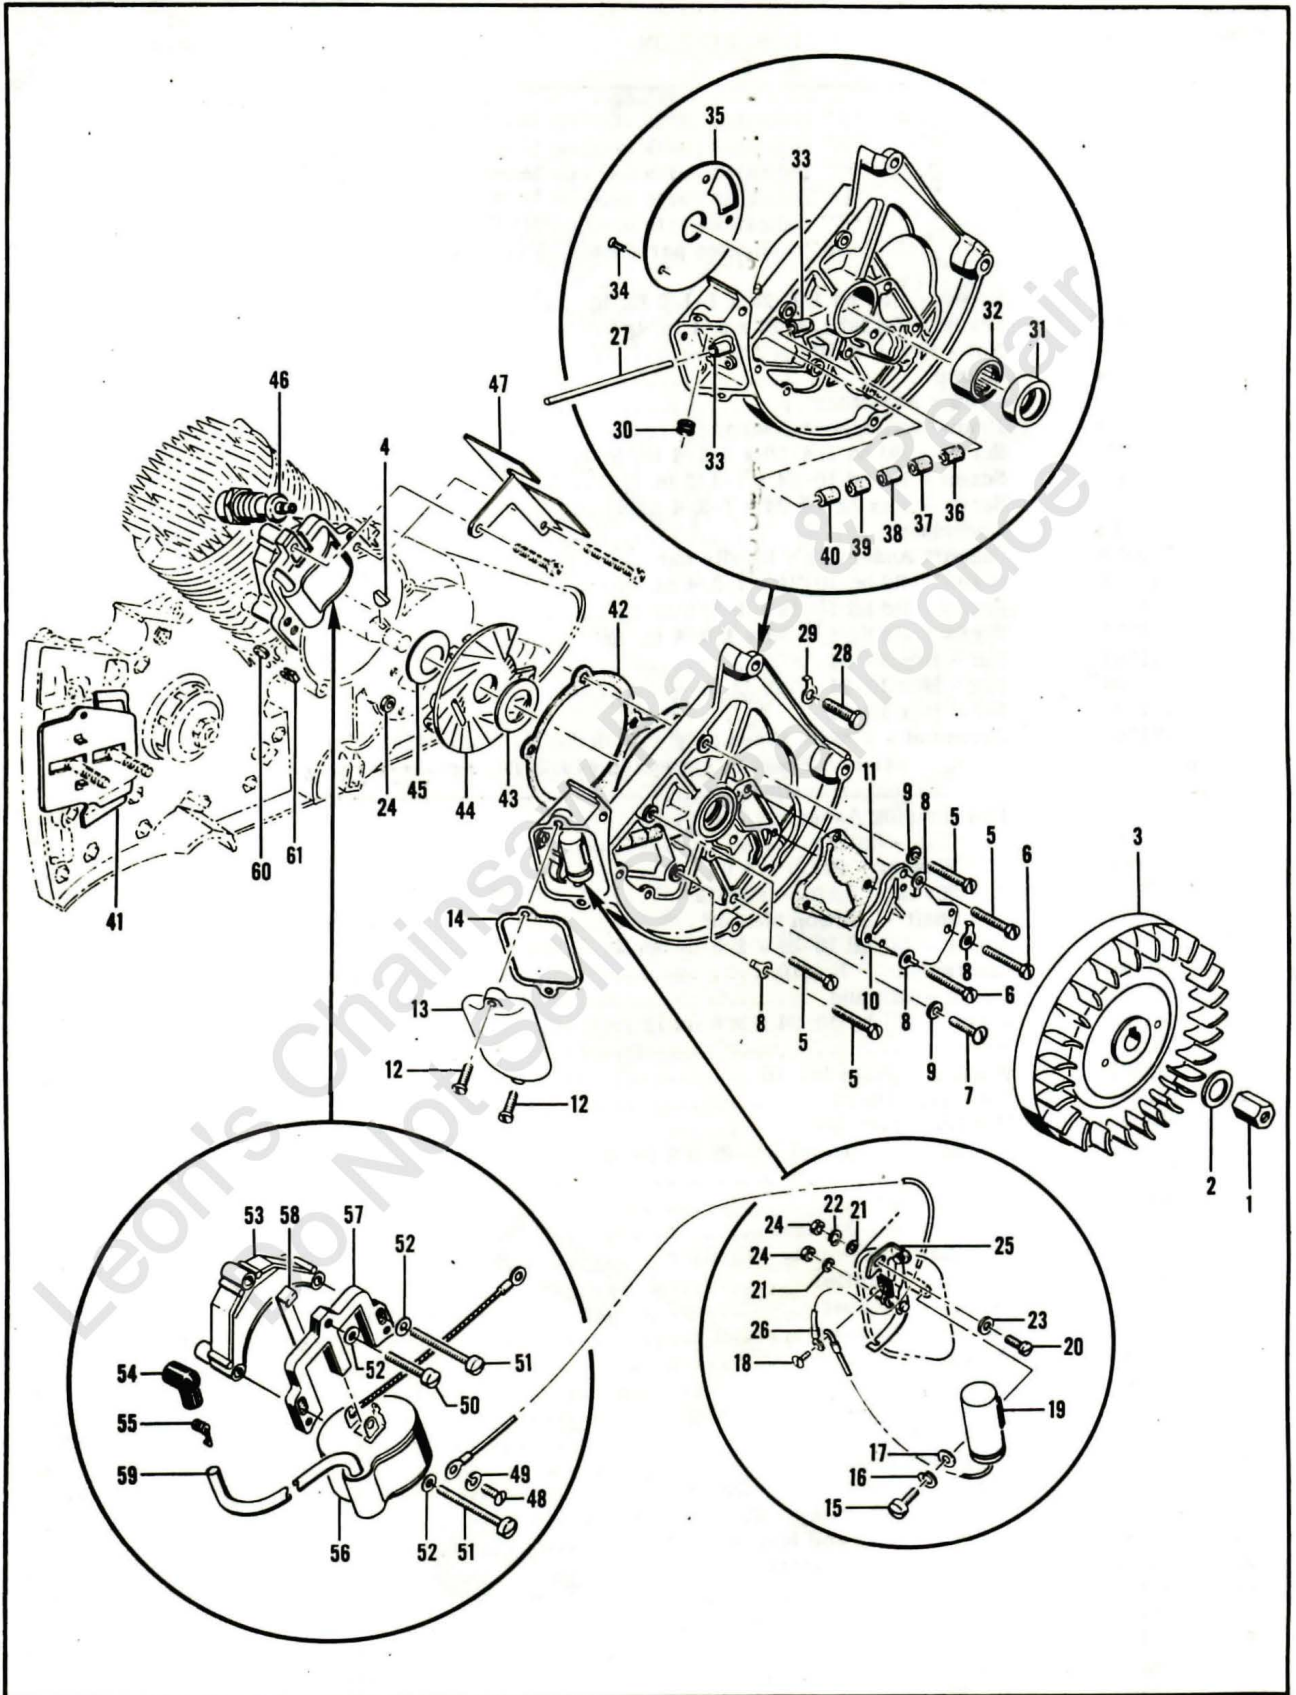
Ignition System, Flywheel, Crankcase Cover and Rotary Valve
